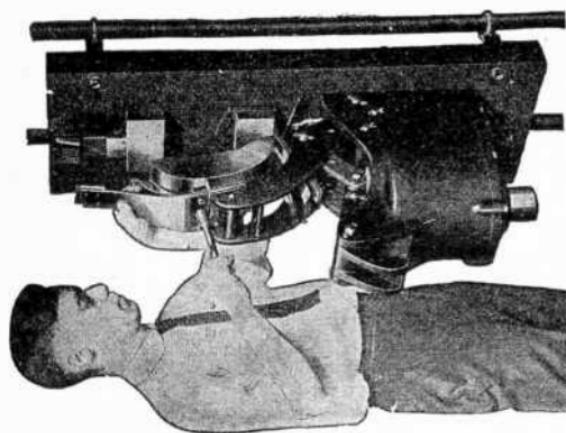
,188.—*How to assemble an air circuit breaker 27. Attaching secondary spring to brush.
